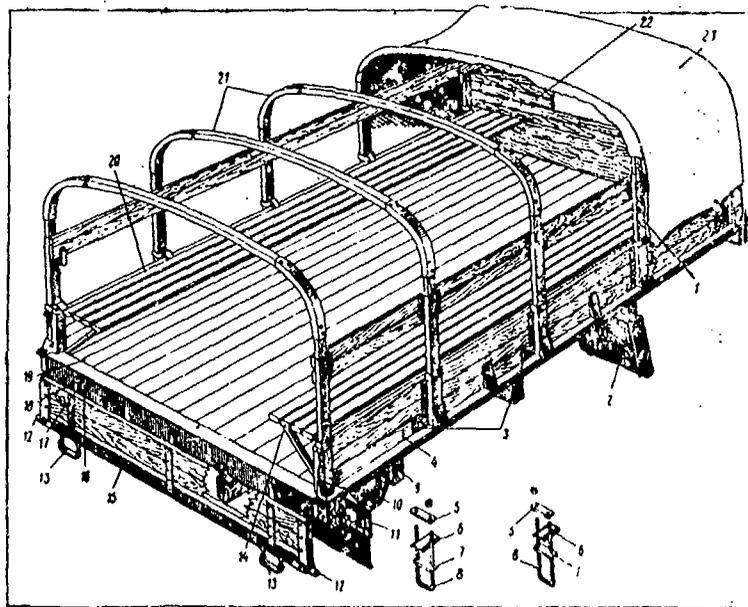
Platform of ZIL-157K: 1, top bar guide; 2 and 11, spray shields; 3, hooks; 4, side wall; 5, cover piece; 6, cover; 7, spacer; 8, stirrup; 9, crossbeam; 10, locking chain; 12, stop loop; 13, steps; 14 and 20, platform side seats; 15, rear wall; 16, lower support loop; 17, support pin; 18, upper support loop; 19, base of platform; 21, top bars; 22, front wall; 23, top
